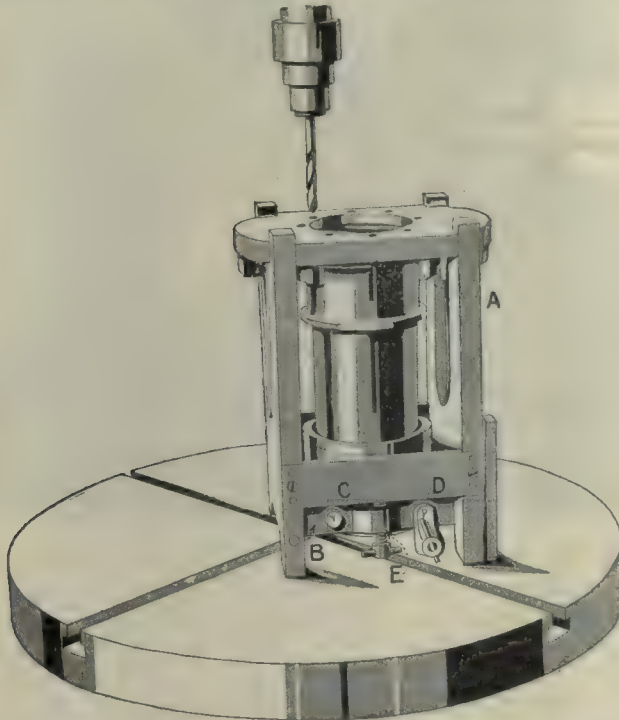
DRILLING CYLINDER-FLANGE BOLT HOLES
